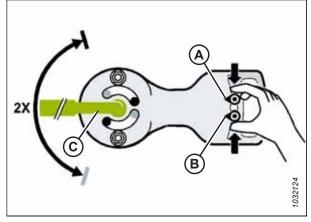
Wing Balance Adjustment – Left Side Shown
